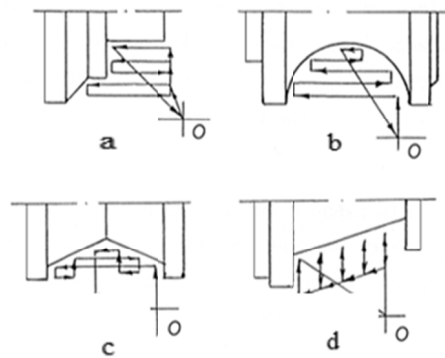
Typical Toolpath Schemes for CNC lathe Machining: (a) loop pattern; (b) zig-zag pattern; (c) curved path; (d) drop-type path.
